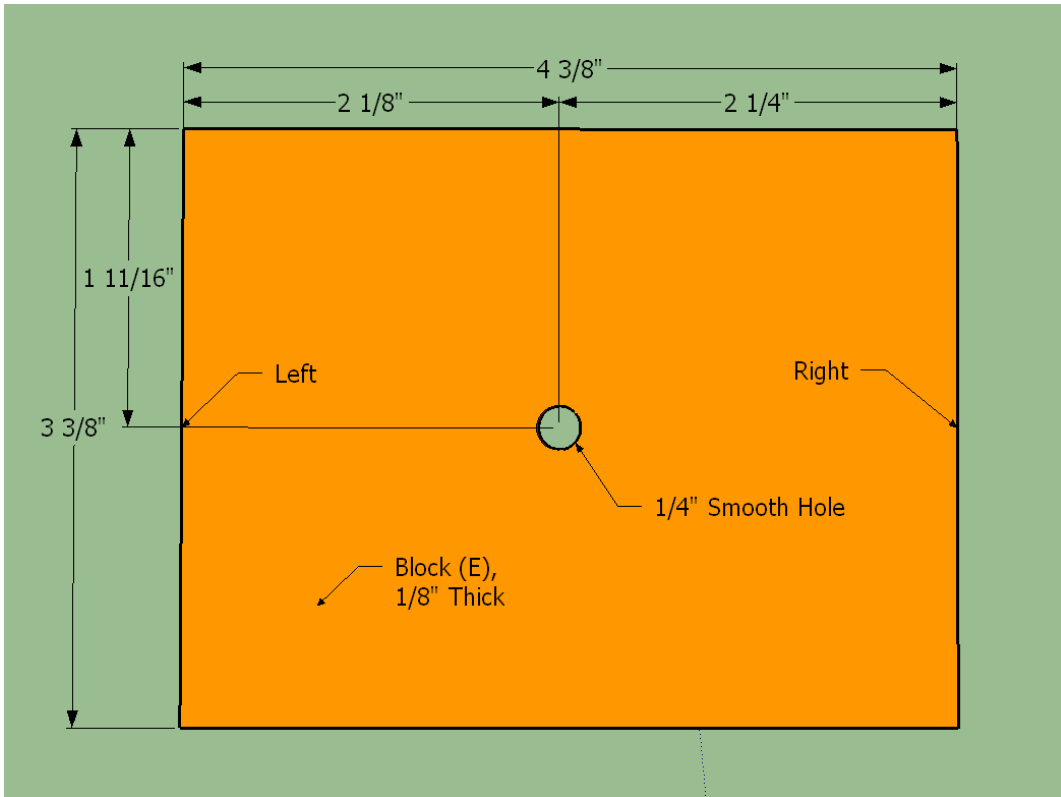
Block (E)- Sample Holder of Rectangular Specimens.
